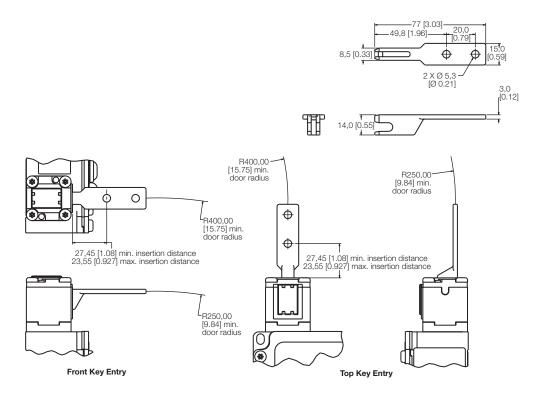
GKL/R Key Code 7 Dimensions mm [in]
